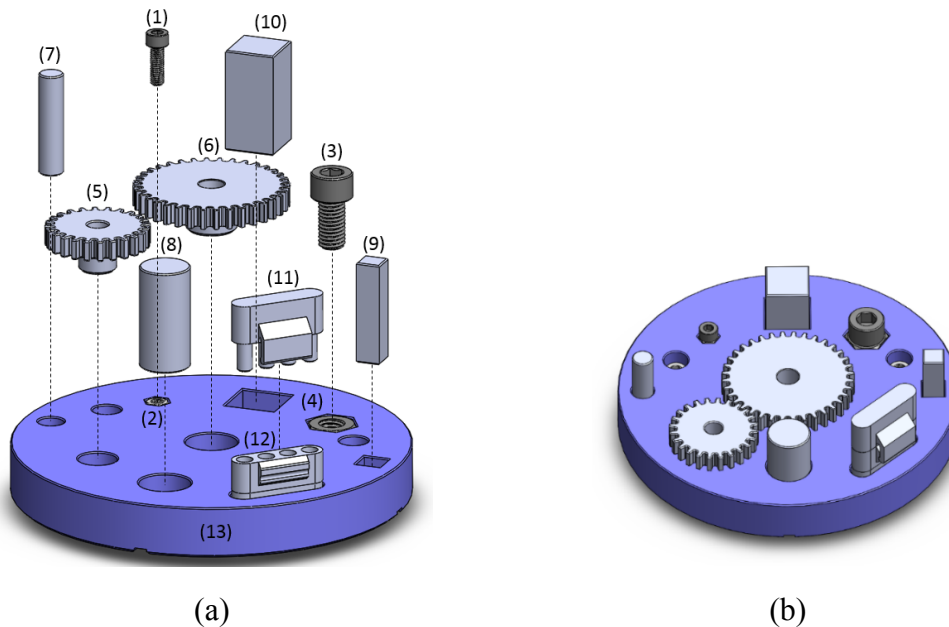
Assembly artifact in (a) exploded and (b) assembled views.
